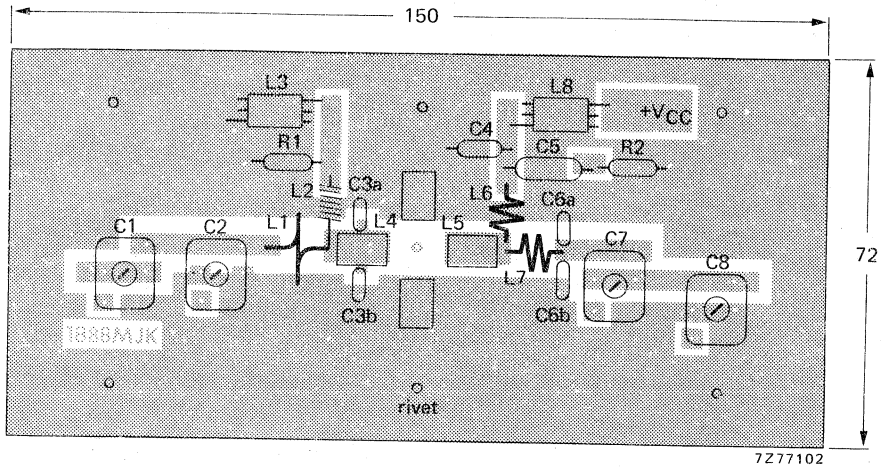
Component layout and printed-circuit board for 175 MHz test circuit.
